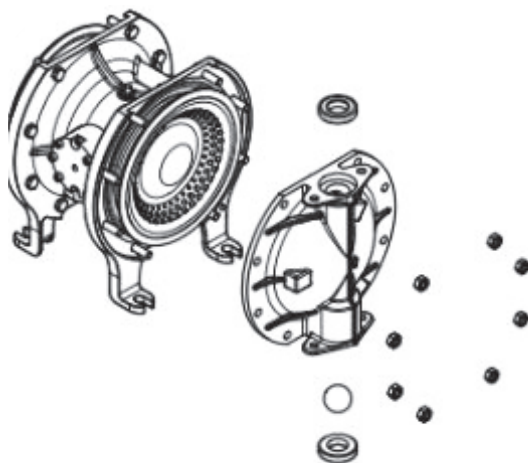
Pump chamber Disassembly incl. valve seats and balls
